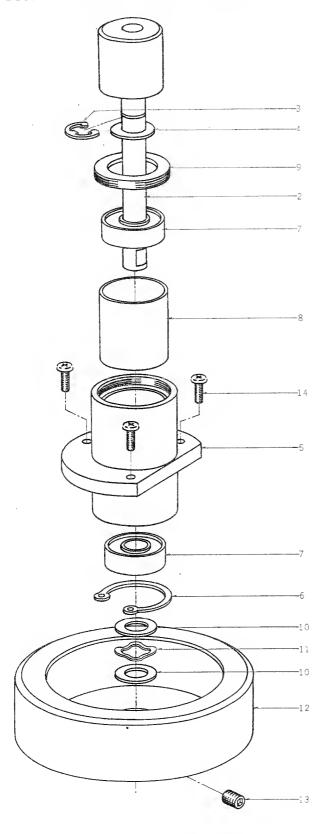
ILLUSTRATION OF REEL MOTOR/REEL TABLE BLOCK
